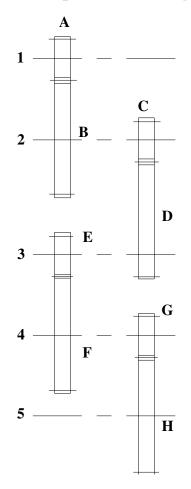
SCHEMATIC DIAGRAM OF GEAR BOX
